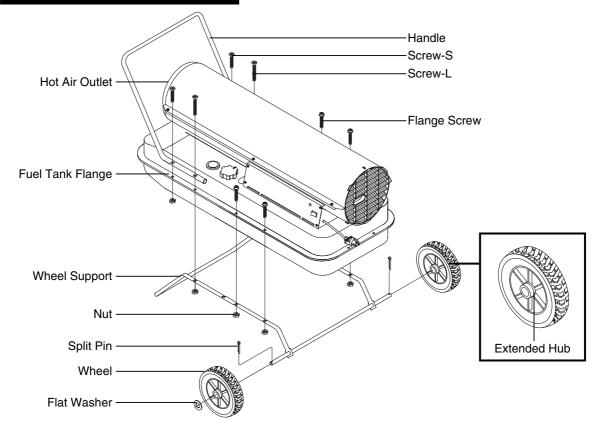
Wheel and Handle Assembly, DFA-125 MODEL
